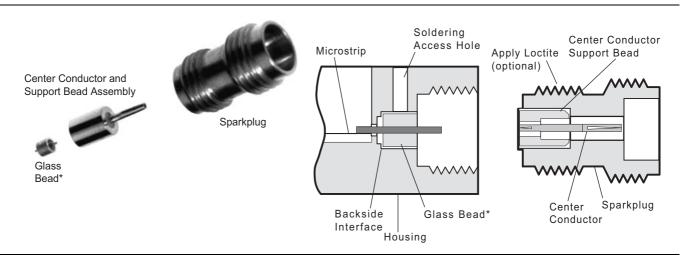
V102F-R Assembly (*Glass Bead not supplied)
